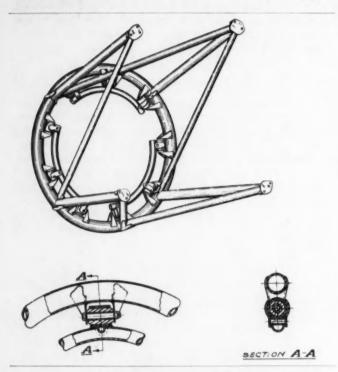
Typical Engine Mount with Rubber Bushings between Engine-Mounting Bolts and Mounting Ring
